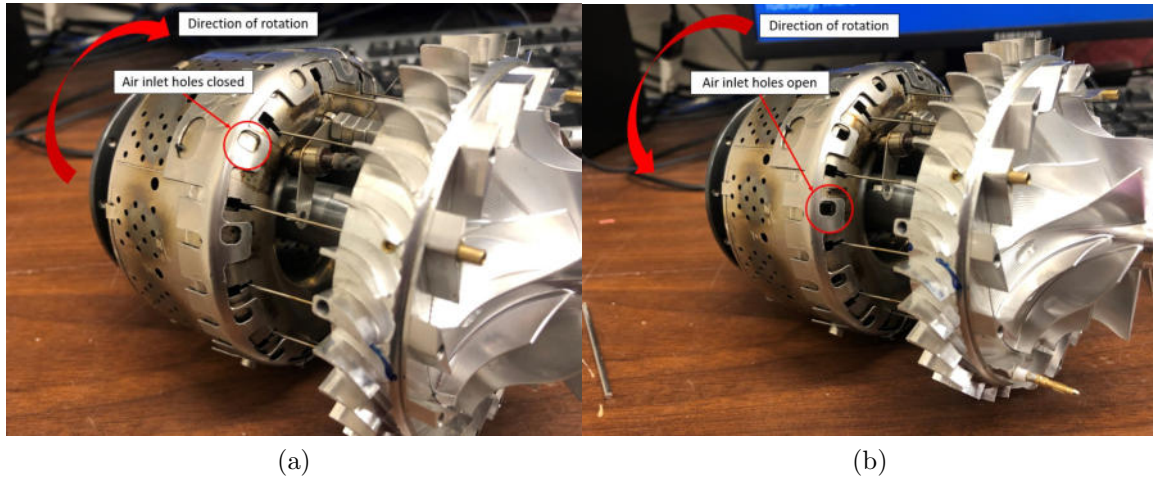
Assembled blockage plate assembly showing the forward dome air inlet holes (a) closed and (b) open when rotated
